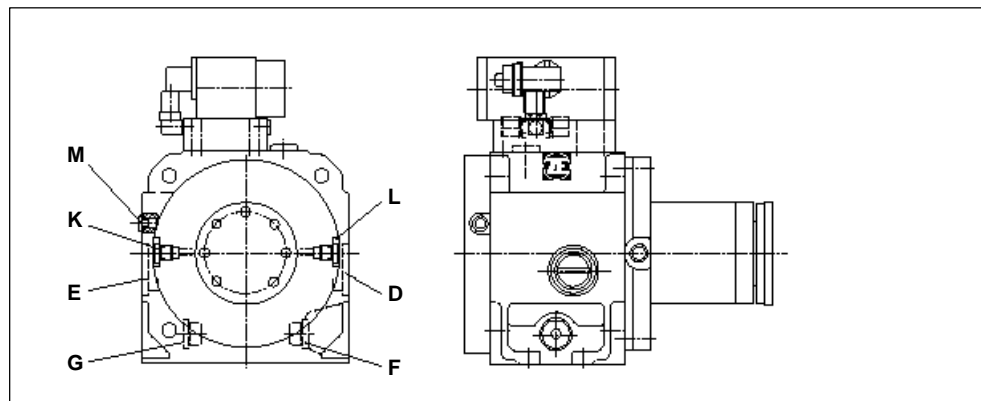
Connections for selector gearbox with selector unit for frame size 100
